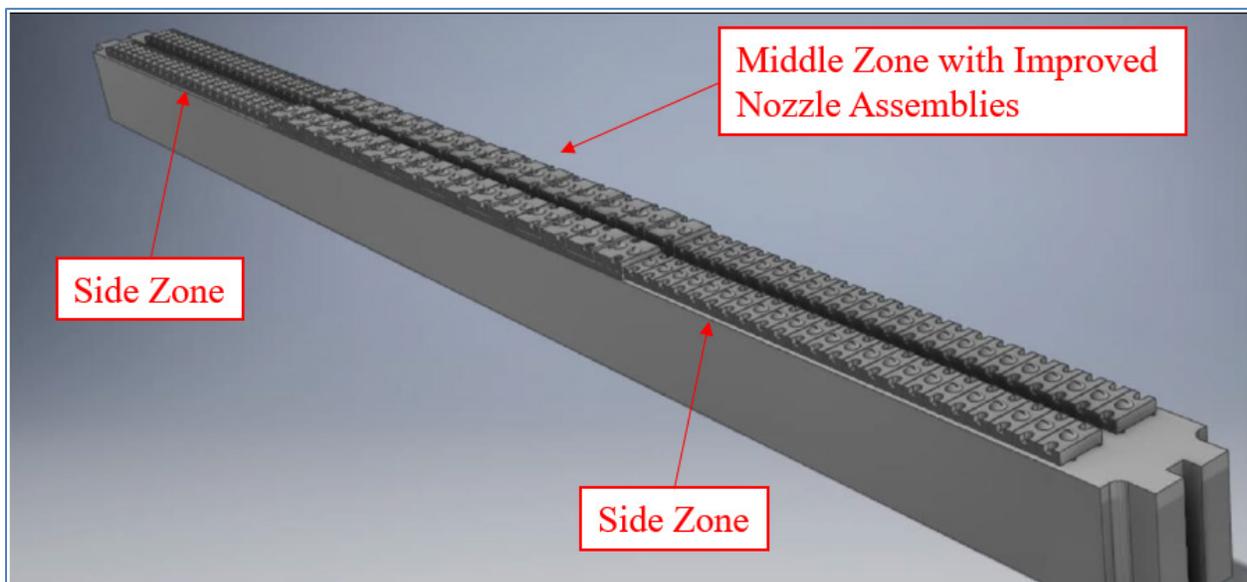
Sectional View of Improved Nozzle Assemblies and Header
